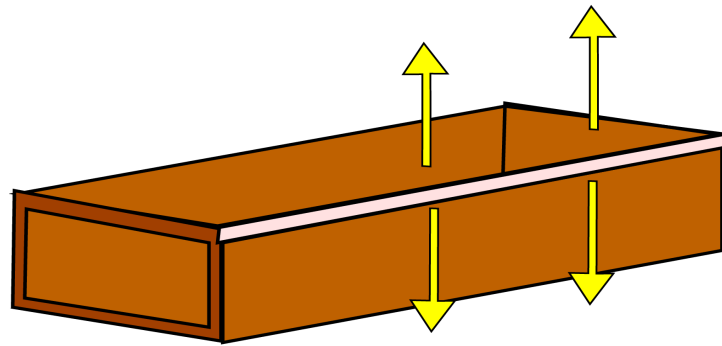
A bad design where the forces will be unsymmetrical, causes a wrong heat balance. The weld is shown in white.
